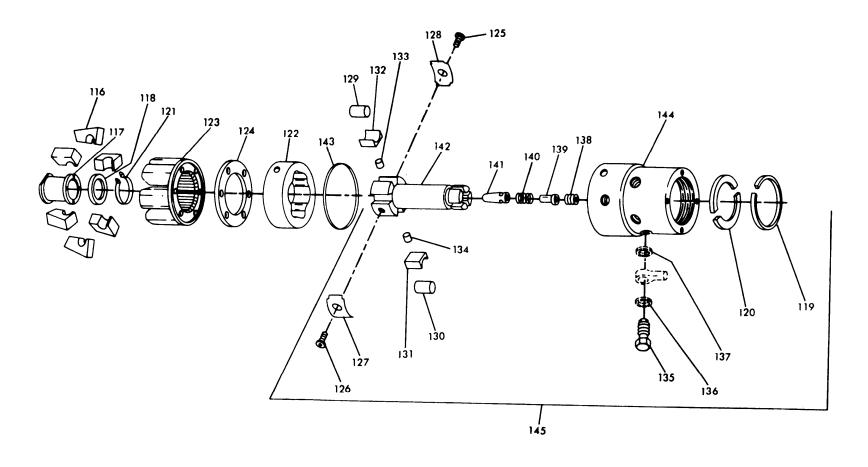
Fuel Injection Pump Assembly (Sheet 4 of 7)
